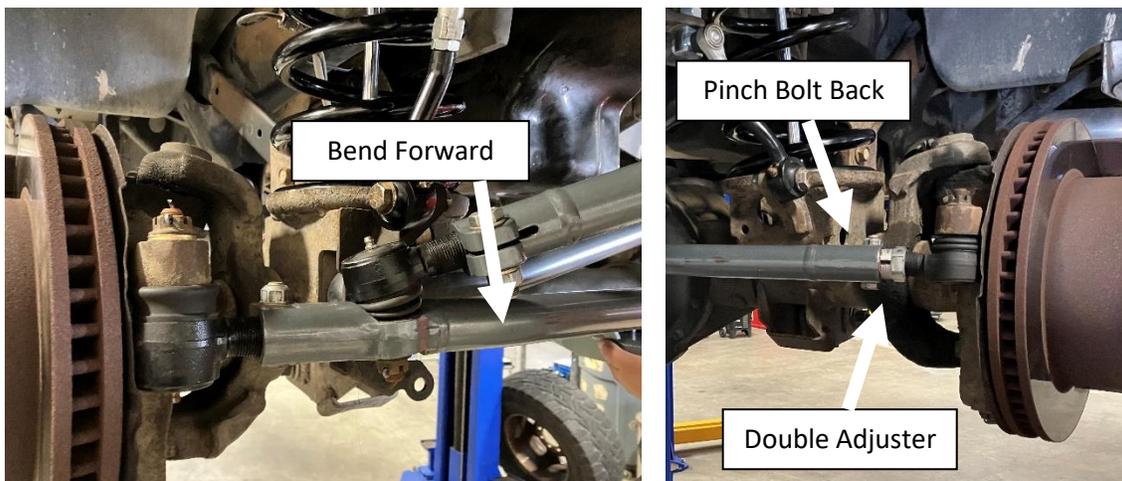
and 4. Tie Rod Shown with Pinch Bolts Back and Bend Forward
